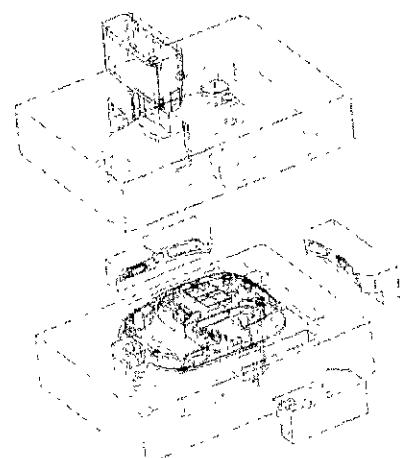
Three-dimensional CAD model for the mold components (cavity, core, and side cores)
